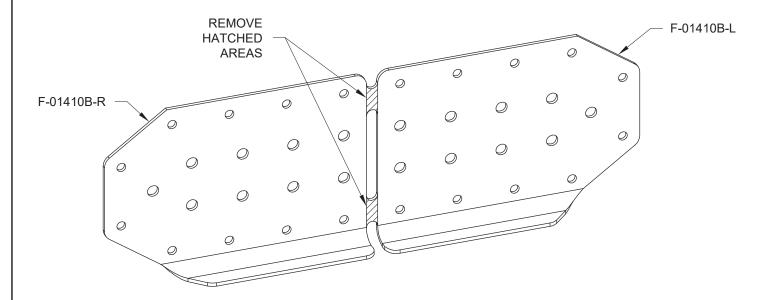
F-01410B BULKHEAD DOUBLERS
